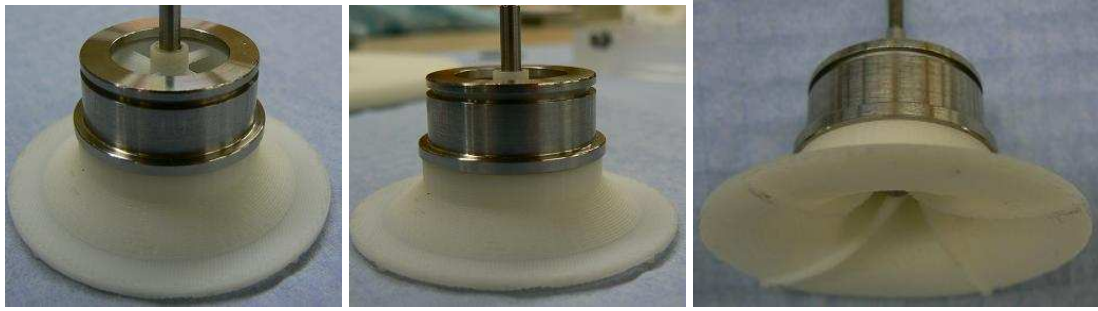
Rotated views of LVAD impeller with the stainless impeller housing for radial bearing location.
